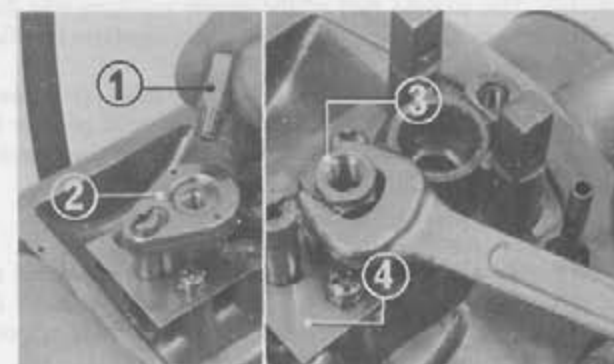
(1) Main jet (2) Jet holder (3) Jet needle (4) Baffle plate
